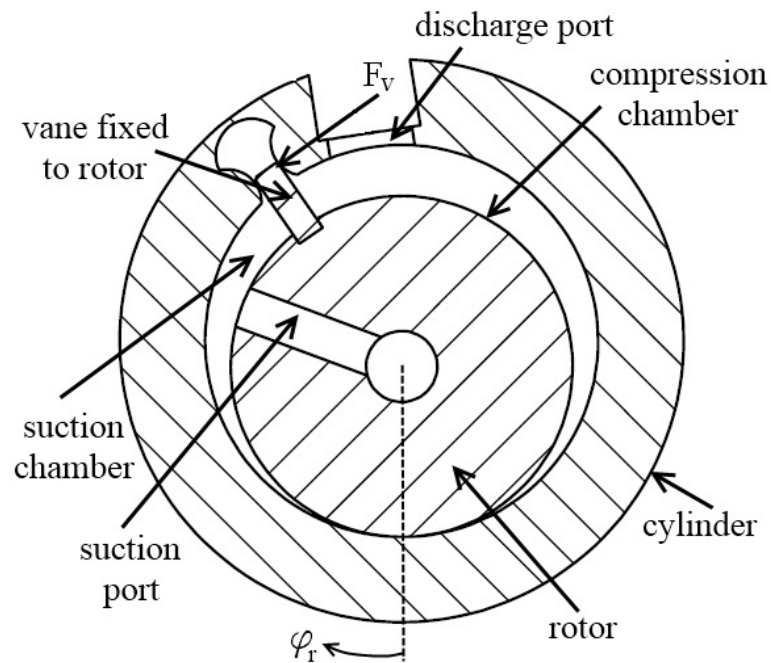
Fixed-vane revolving vane compressor with rotor drives
